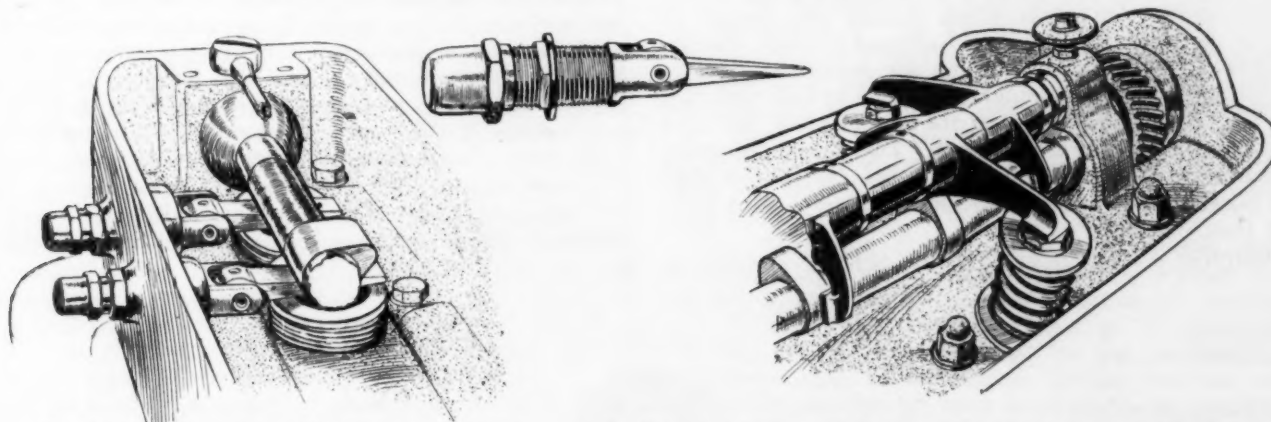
THE DIATTO CAM MECHANISM (AT THE LEFT) THAT EMPLOYS PIVOTED AND TAPERED TONGUES INTERPOSED BETWEEN THE CAMS AND THE VALVES AND (AT THE RIGHT) THE OVERHEAD CAMSHAFT OF THE ANSALDO ENGINE THAT USES ROCKING LEVERS WITH BEARINGS ON A SHAFT IMMEDIATELY ABOVE AND RUNNING PARALLEL TO THE CAMSHAFT
